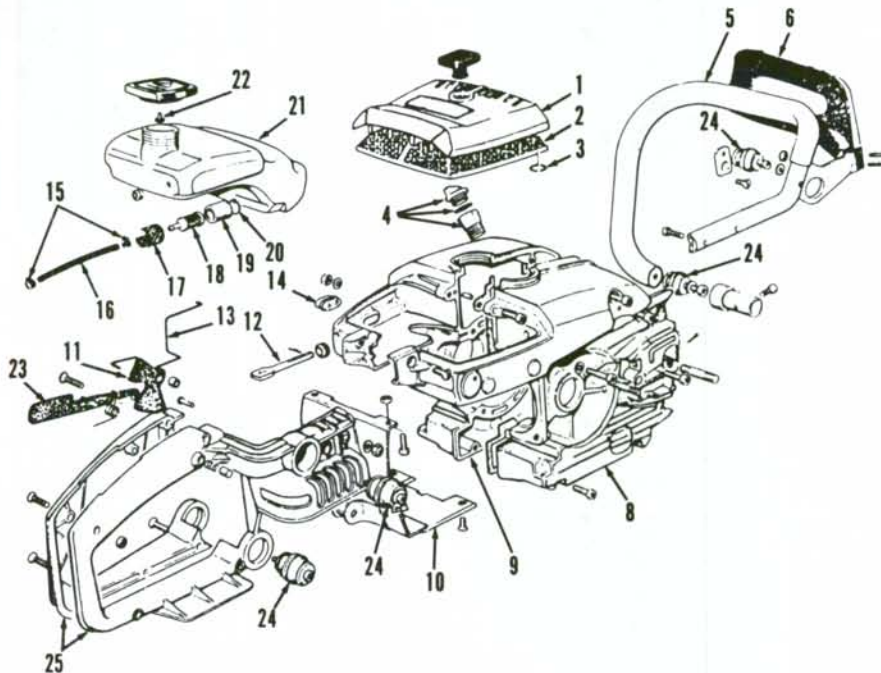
Exploded view of crankcase, front handle assembly, rear grip assembly, fuel tank and related components used on Model Super Pro 70. Refer to legend in Fig. AP55 for component identification except, safety lever (23), vibration isolator (24) and rear grip assembly (25). Super Pro 90 and Super Pro 120 models are similar.
